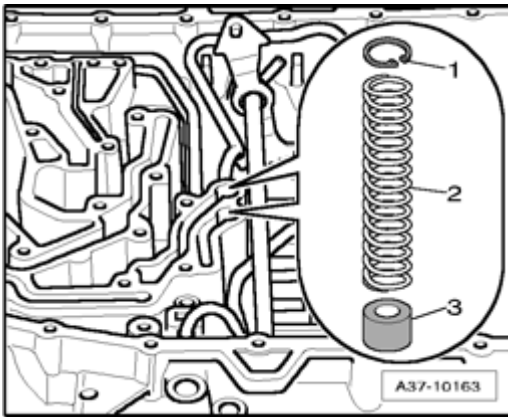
Securing Rings, Coil Springs And Sealing Sleeve
